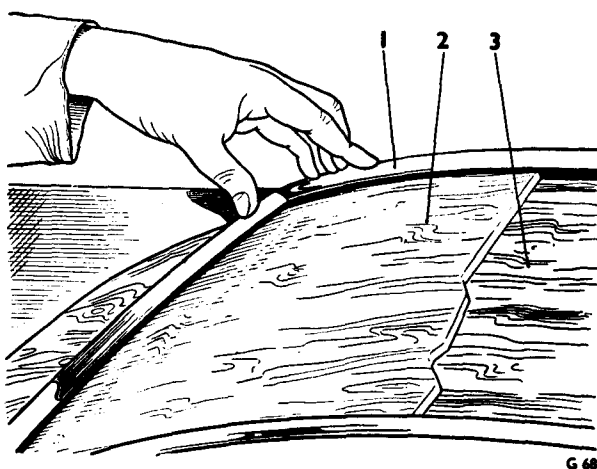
CHECKING THAT THE EMBELLISHER CONFORMS TO THE SHAPE OF THE WINDSCREEN
